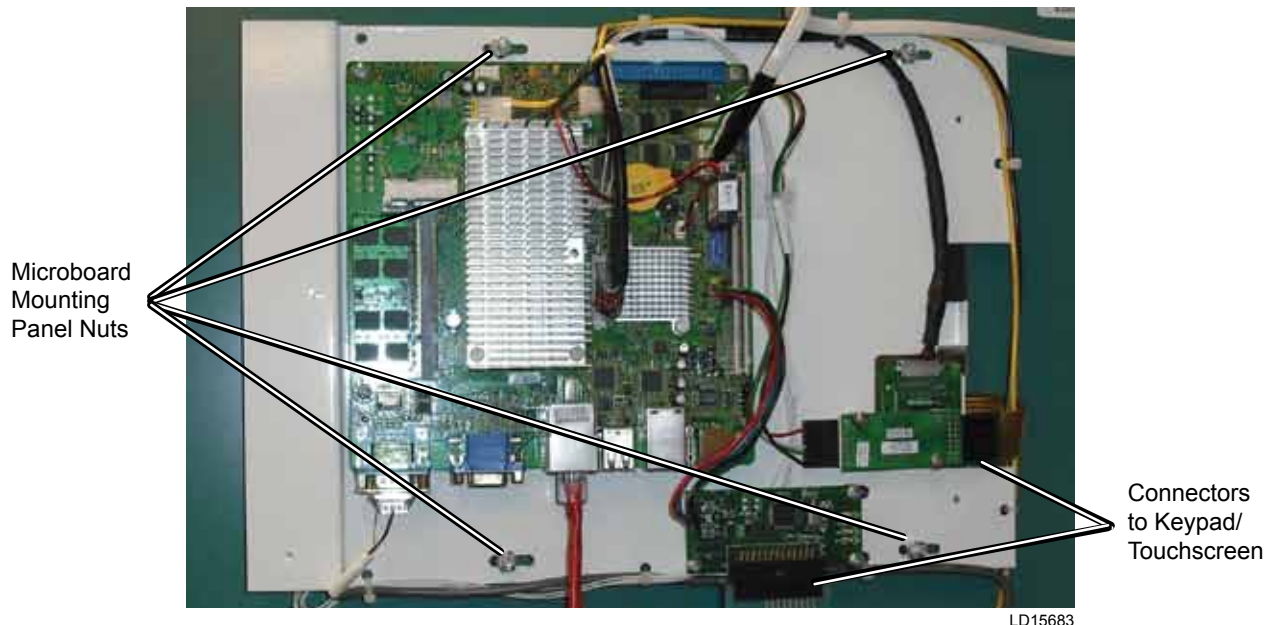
MICROBOARD MOUNTING NUTS AND RIBBON CONNECTORS
